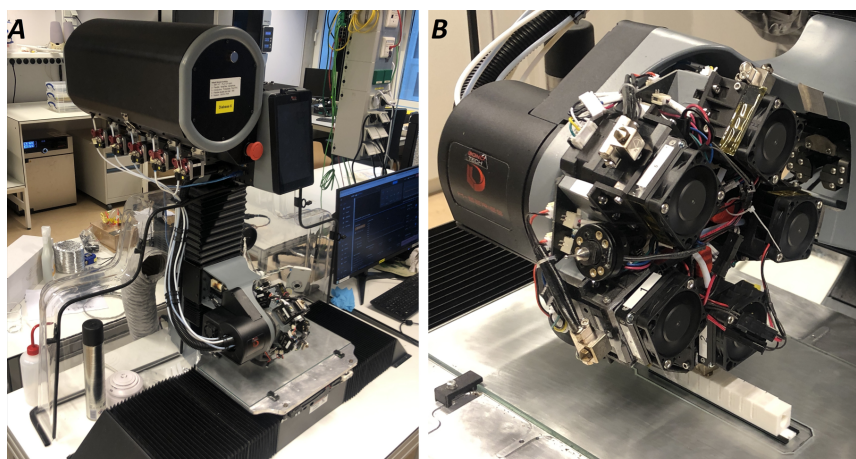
A. Diabase H-Series multi-material FFF 3D printer. B. Detailed view of the rotary toolhead.
